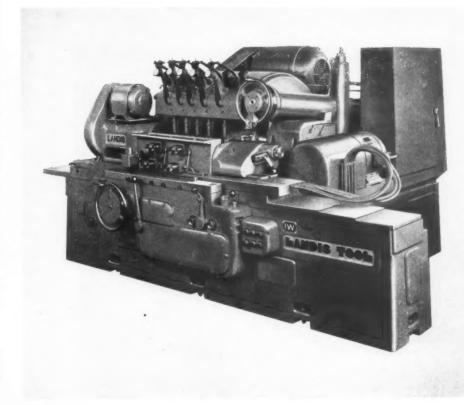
Multiple-wheel Precision Cylindrical Grinder Brought out by the Landis Tool Co.
